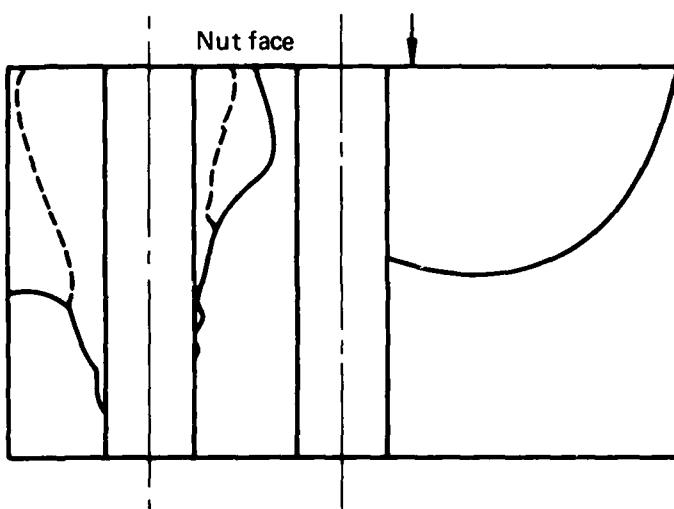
(c) FRACTURE SURFACES: SPECIMEN TYPE (C)
